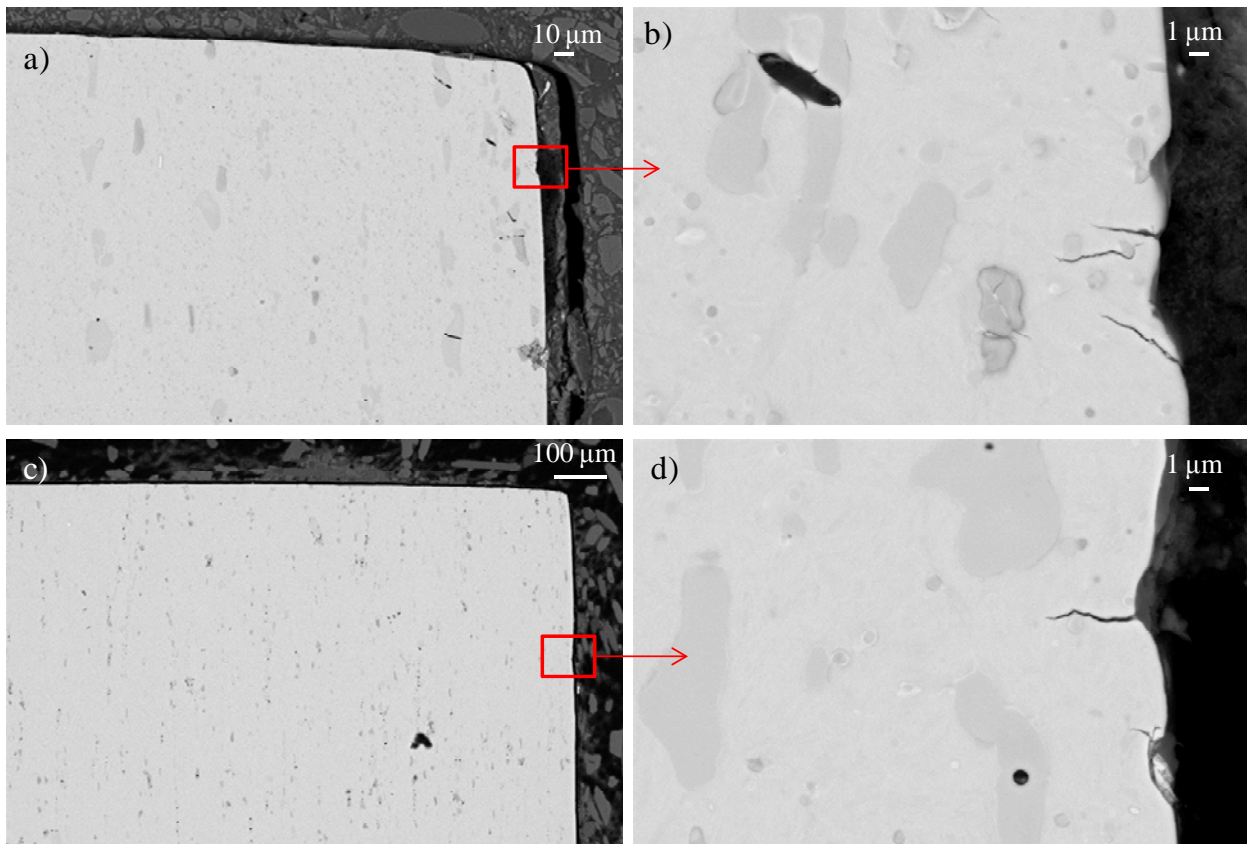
Microstructural inspection of the cross section of UNIVERSAL lower tool with carbides aligned following the stroke direction at 15000 strokes
